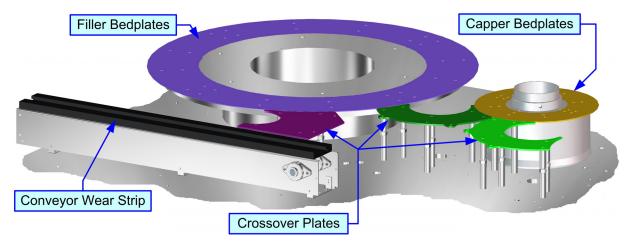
, Crossover Plates, Bedplates, & Wear Strips
